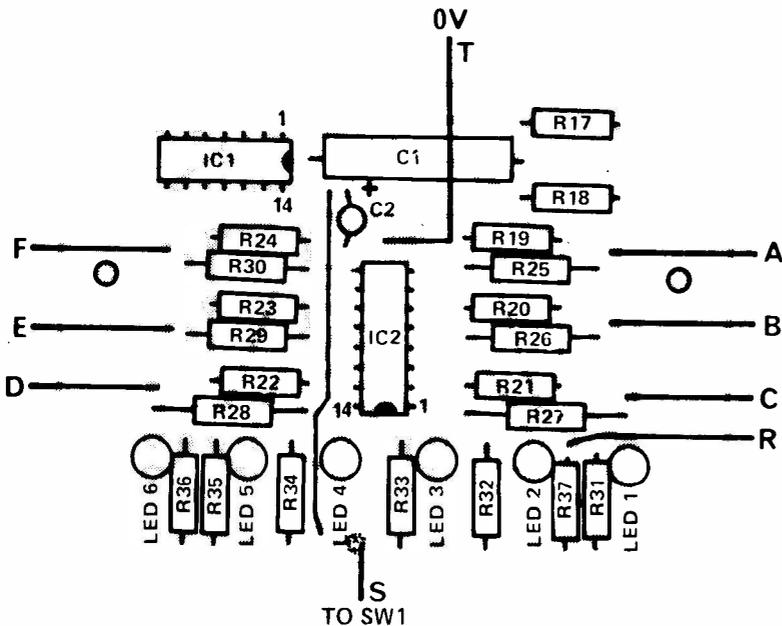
Component overlay for board ETI-123a. Note that C1 may need to be mounted on reverse side, and that the LEDs should be mounted as detailed in the text.
